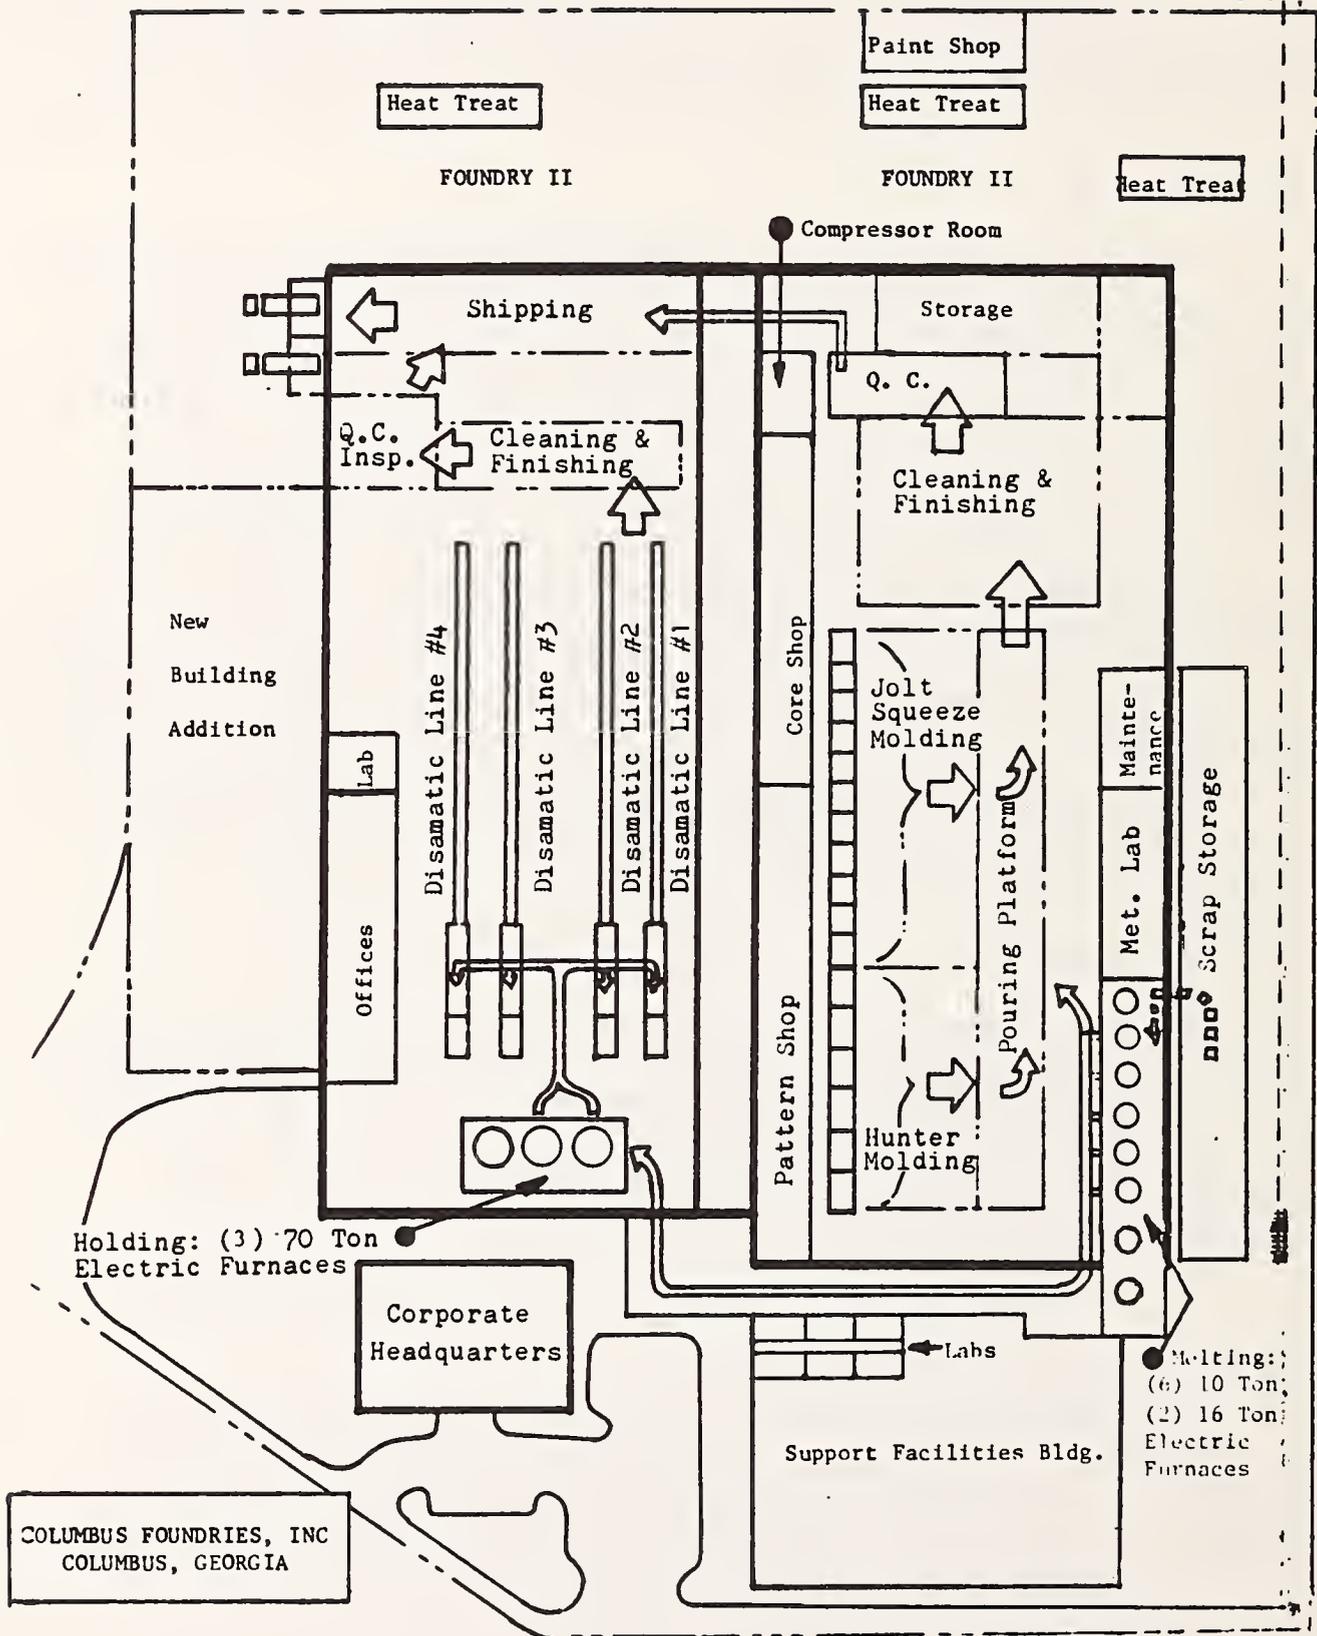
COLUMBUS FOUNDRIES PLANT LAYOUT
